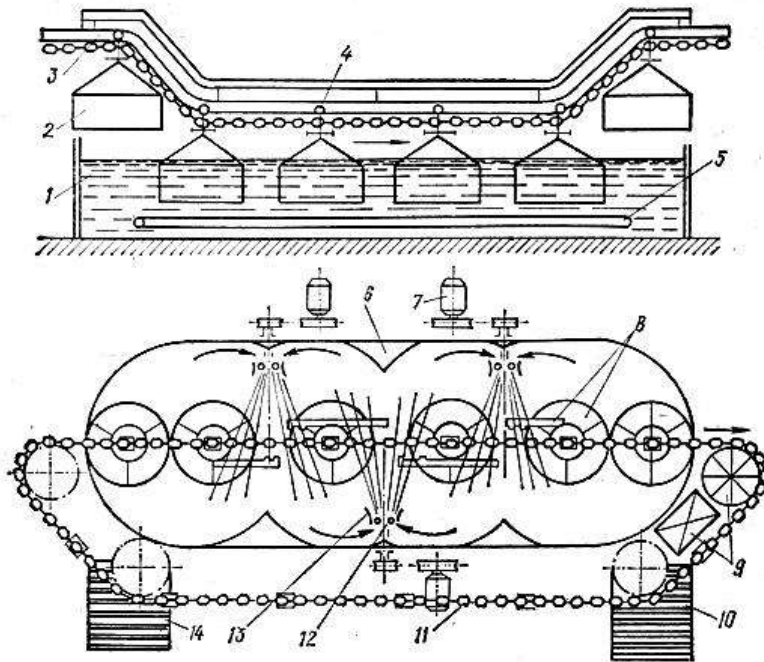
Scheme of conveyor washing machine 1 – bath; 2 – container; 3 – beam, 4 – carriage; 5 – tube; 6 – divider; 7 – electric motor; 8 – gear with rack; 9 – drive device; 10 and 14 – live rolls; 11 – container; 12 – vane pump; 13 – diffuser.
